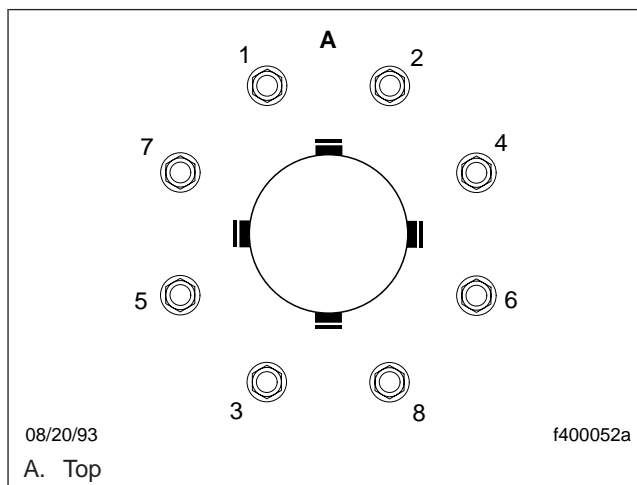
, 8-Hole Disc Wheel Tightening Sequence
